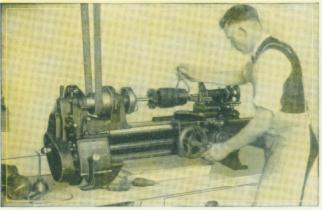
The above illustration shows a 9-inch Quick Change Gear Bench Lathe in operation. This Lathe is equipped with Automatic Friction Longitudinal and Cross Feeds.
